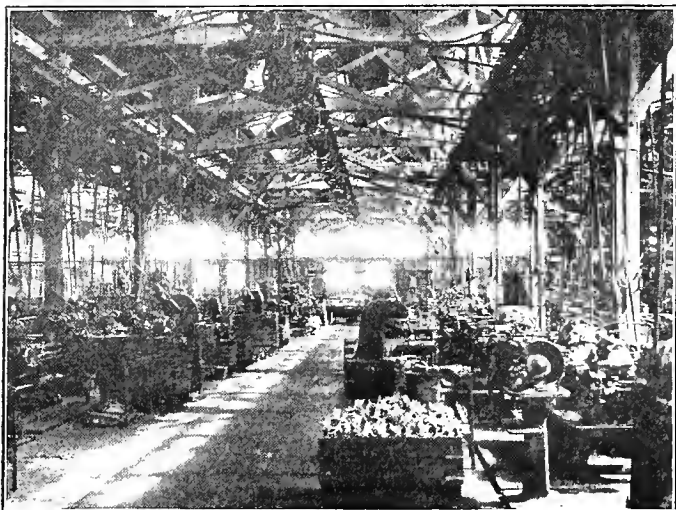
Machine shop of the Holt Manufacturing Company at Stockton, California, showing group drive through a ball-bearing line shaft, a case where this type of drive is highly economical.
